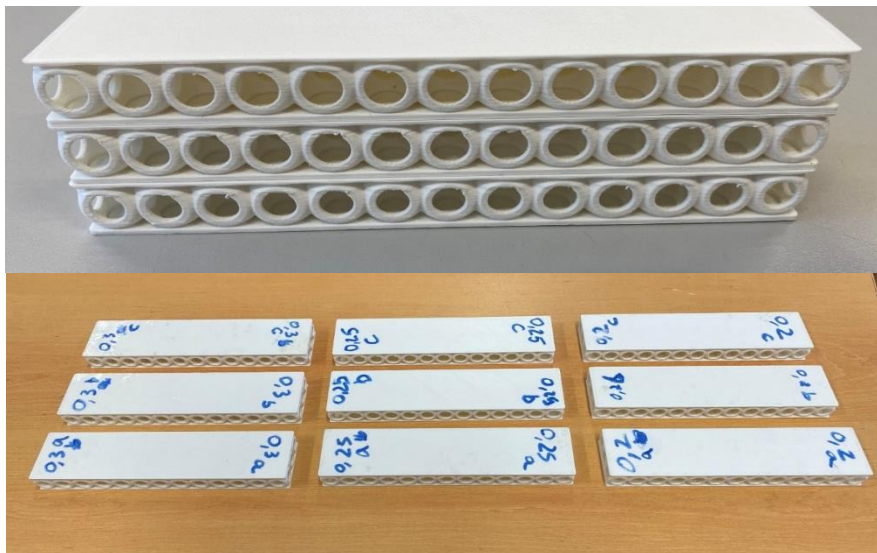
Bending specimens manufactured ready to be experimentally tested
